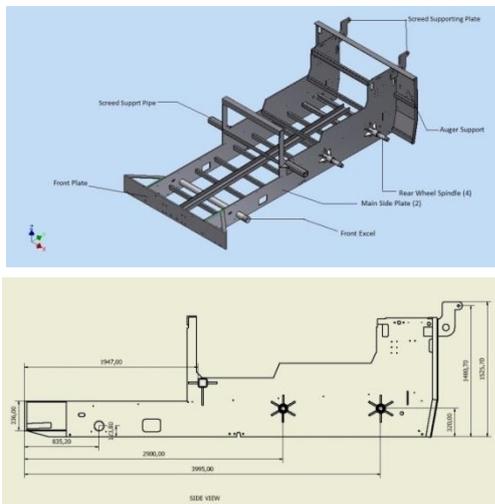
Chassis CAD Model – AP550 and Side View of Chassis
